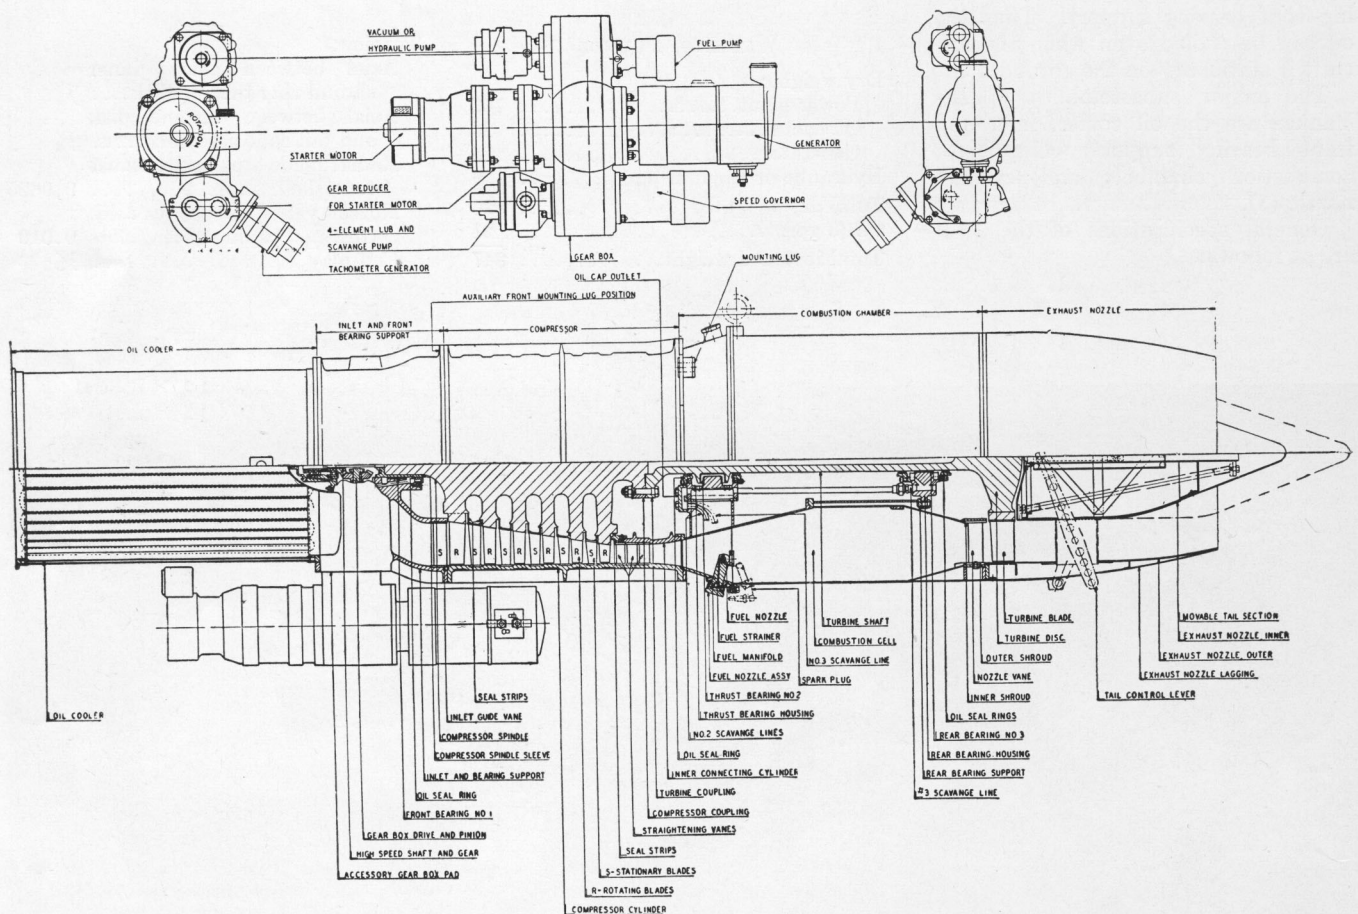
Cross-sectional drawing of Westinghouse 19-B jet engine showing major units. Accessories in this case are mounted on the bottom of the unit.
